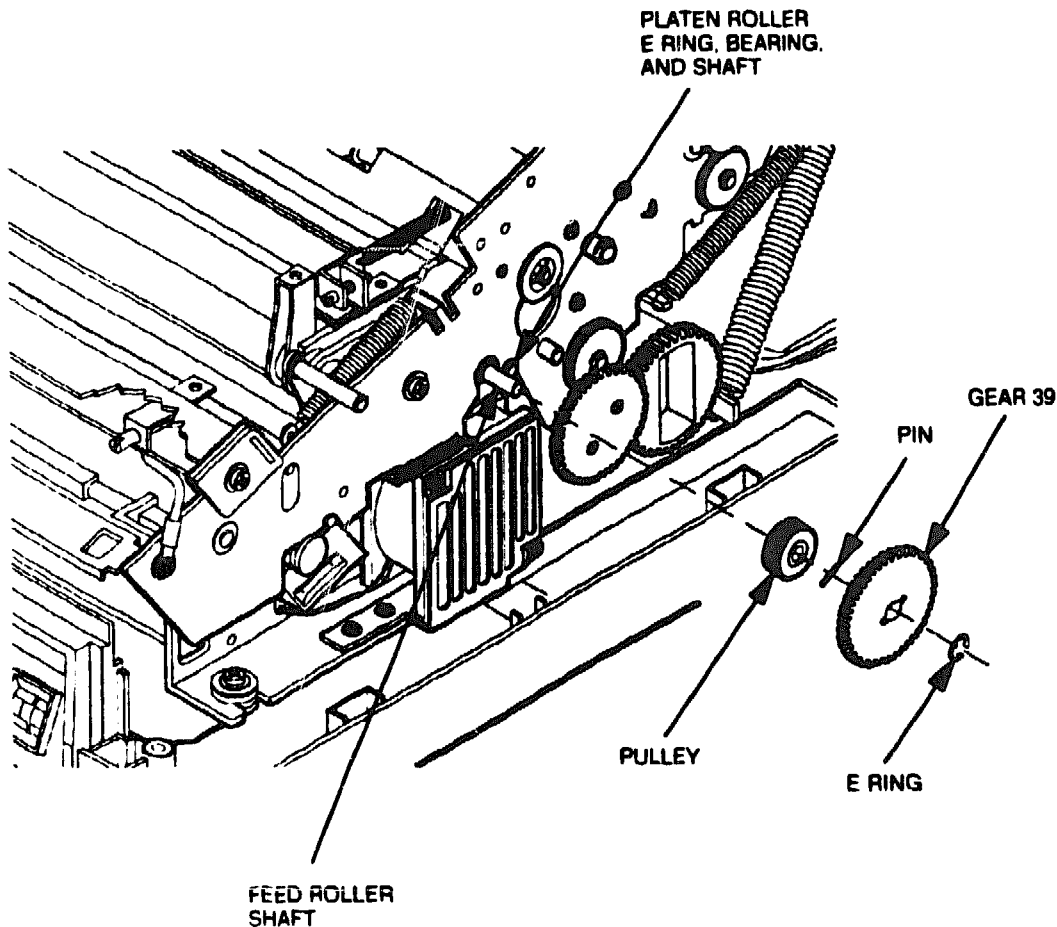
Right Side Frame E Rings, Gears, Bearings, and Shafts
